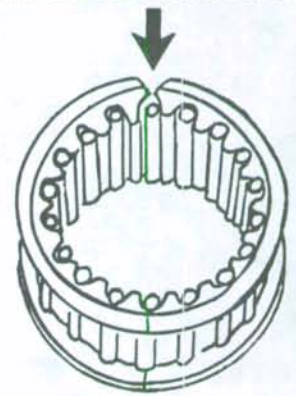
Connecting rod bearing cages have one ground corner as indicated by arrow. Ground corners must be matched during assembly.
